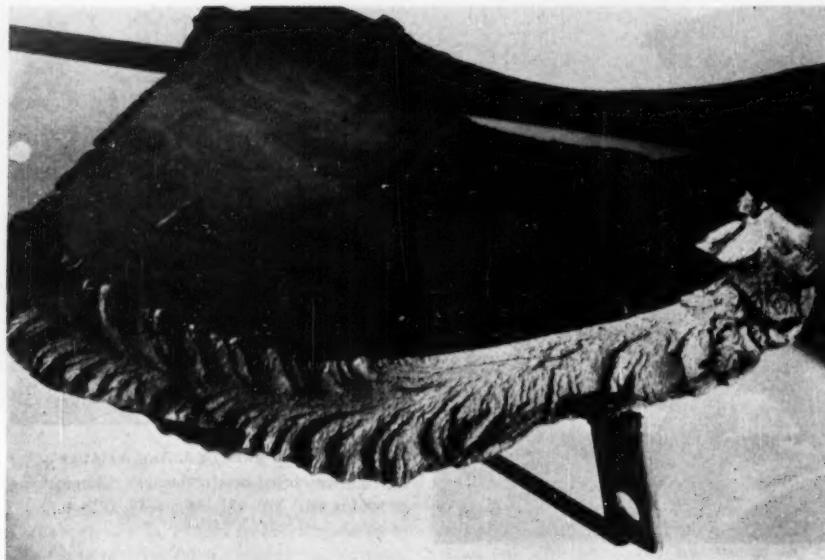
FRAGMENT OF A FRACTURED DRUM
